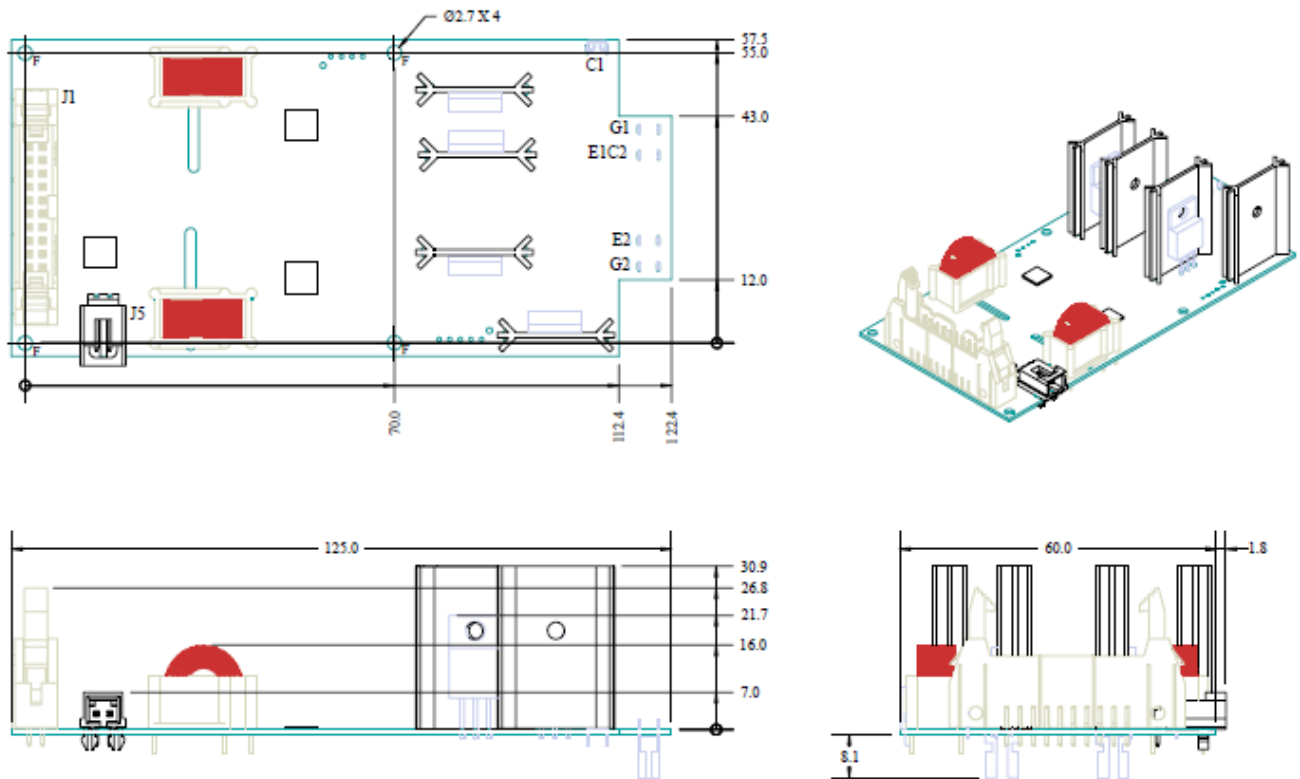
Dimensions of the 62EM1-62mm Electrical Gate Driver (+/- 0.1mm)
